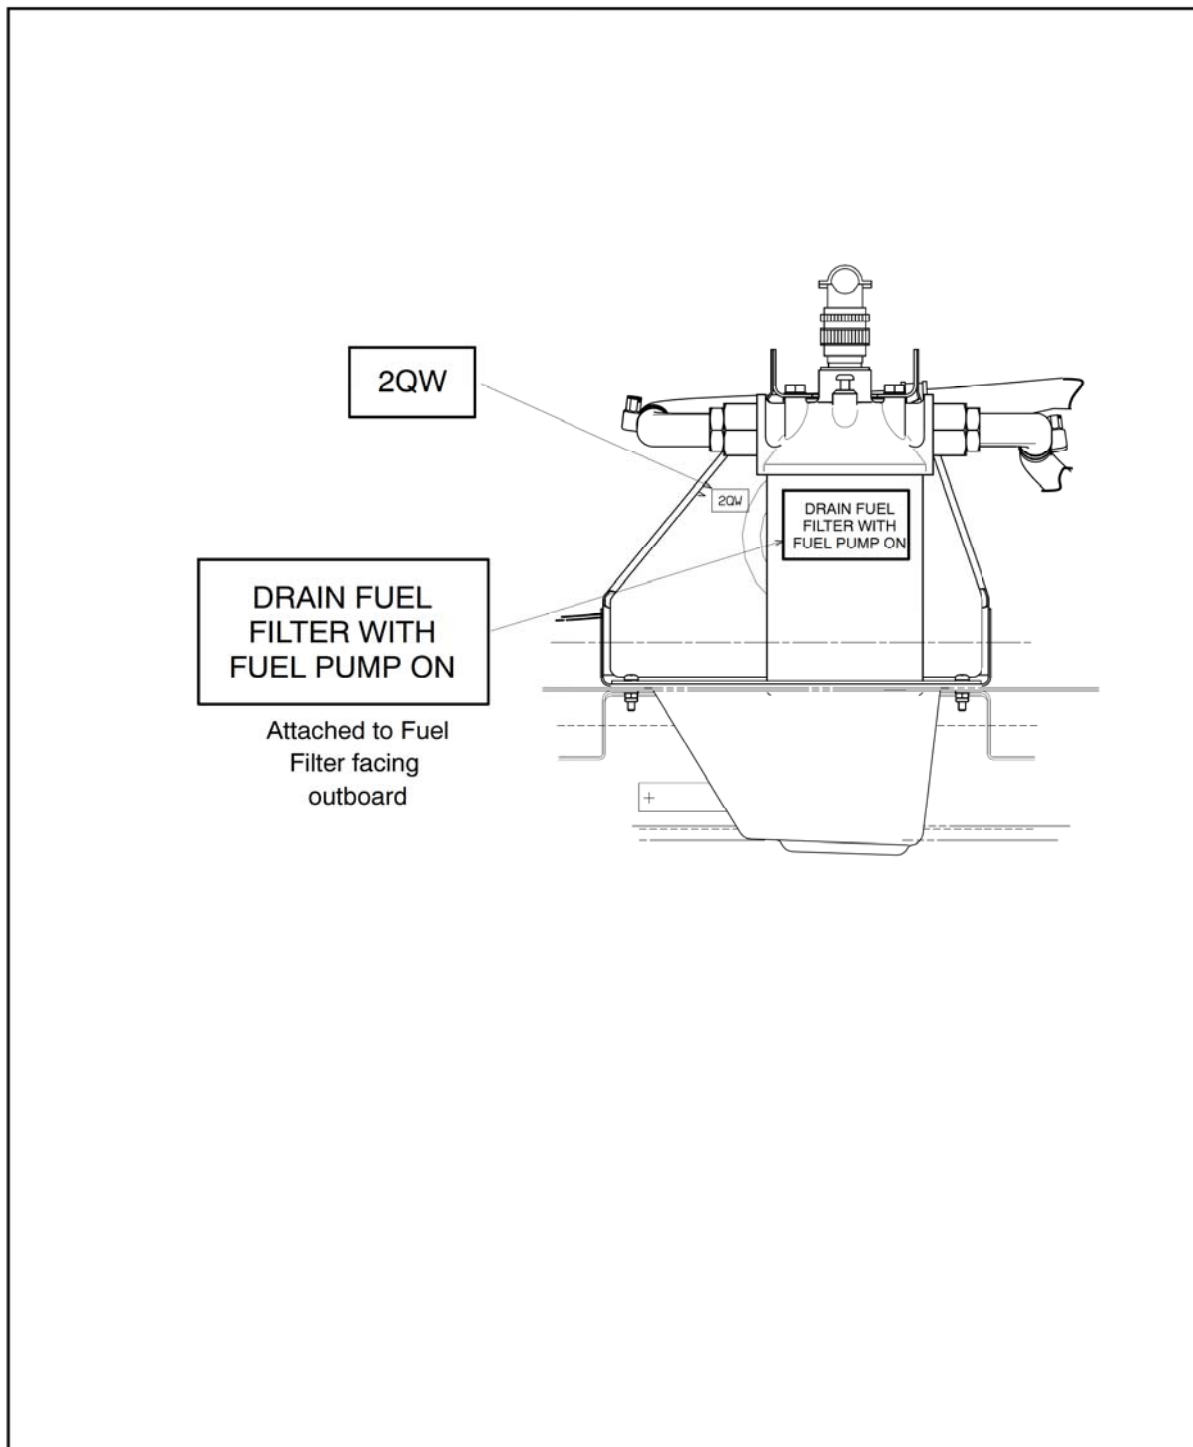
Typical label locations on Fuel Filter and Support Assembly
